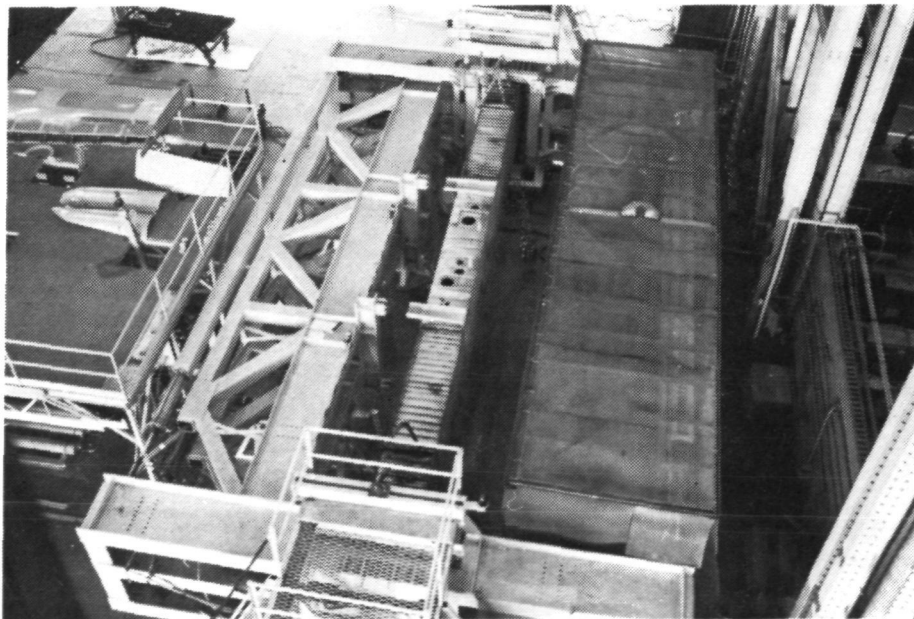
WING BOX INSTALLED IN TEST FIXTURE
